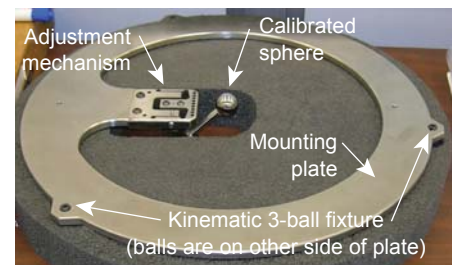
Master ball fixture used to calibrate the two measurement probes on PrISMM.
